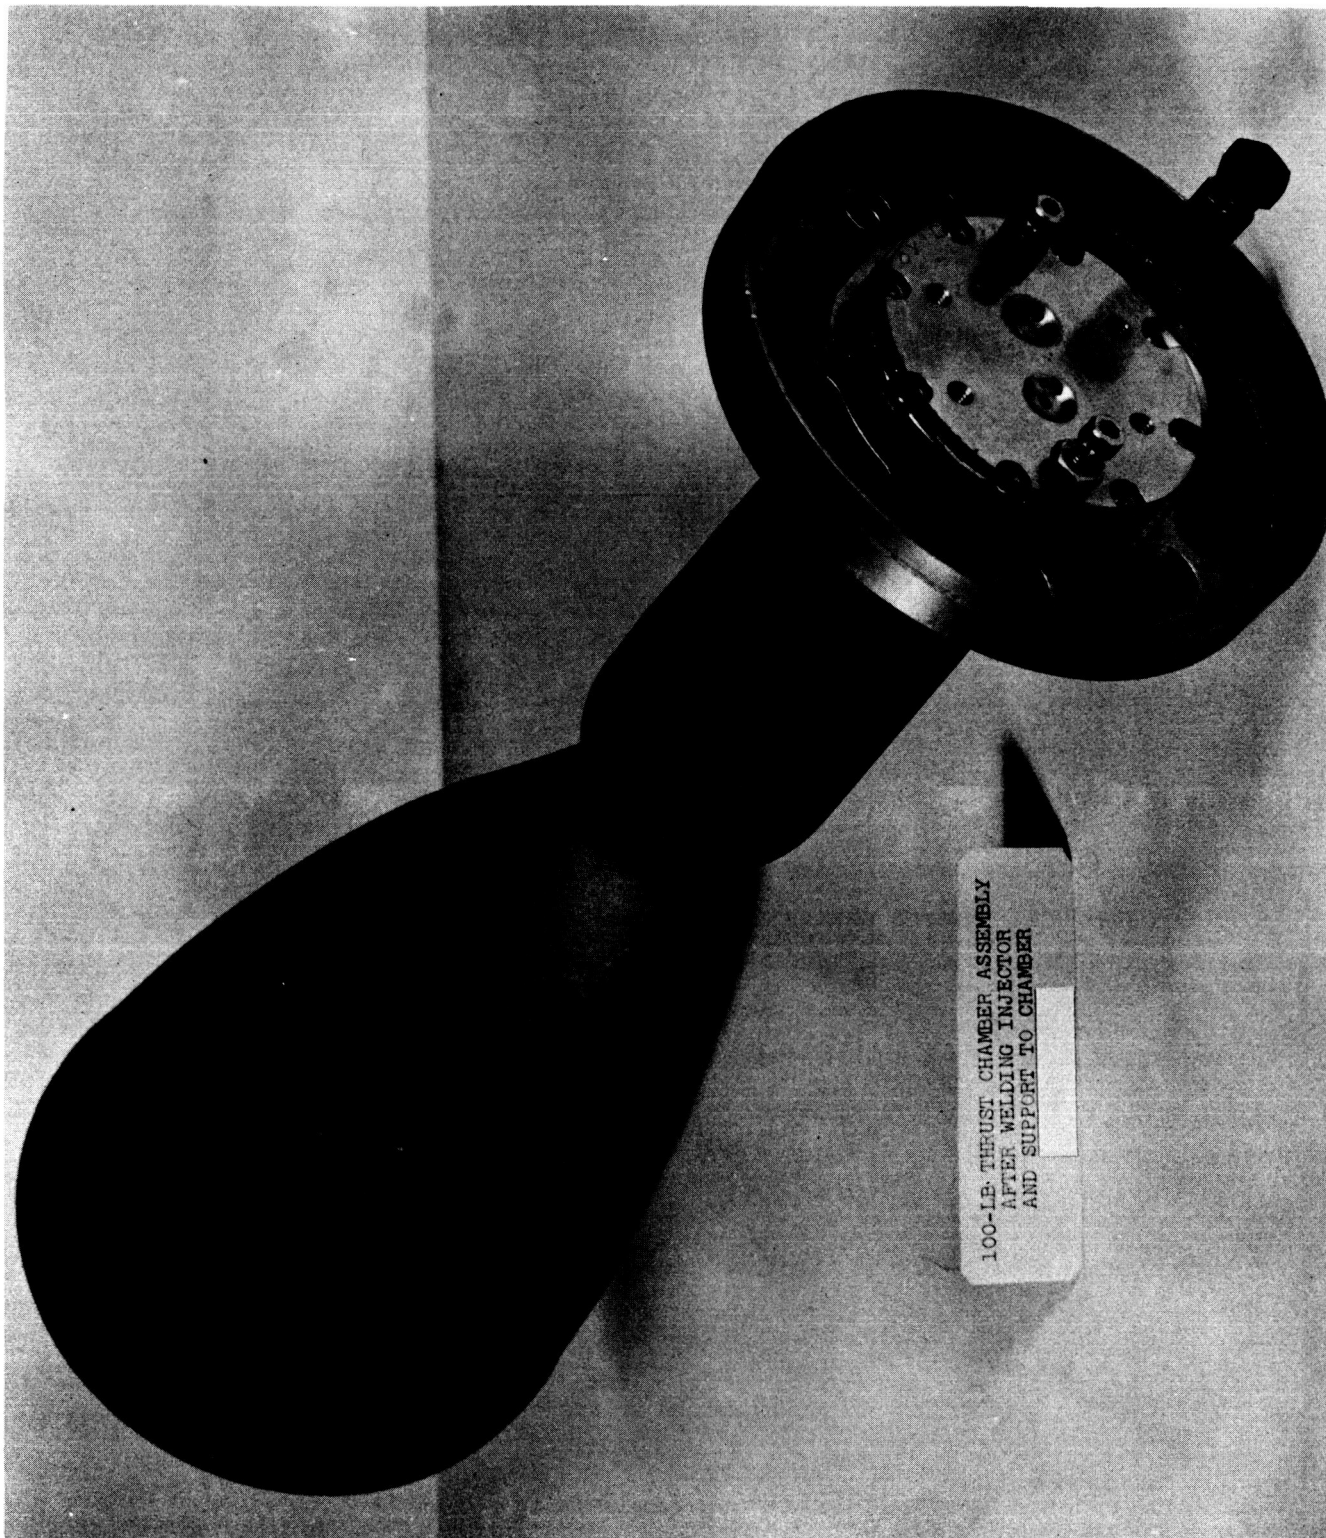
100-lb Thrust Chamber Assembly After Welding Injector and Support to Chamber
